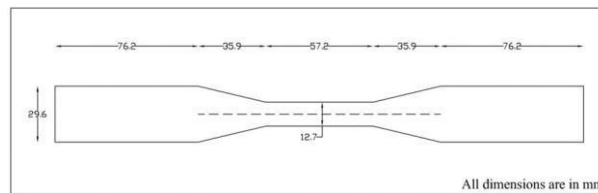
FIG II. STANDARD COUPON TEST SPECIMEN DIMENSION
